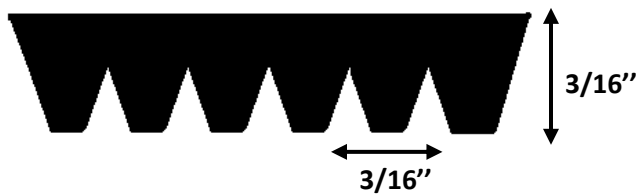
Illustration of Micro-V belts used in mechanical input assembly [14].
